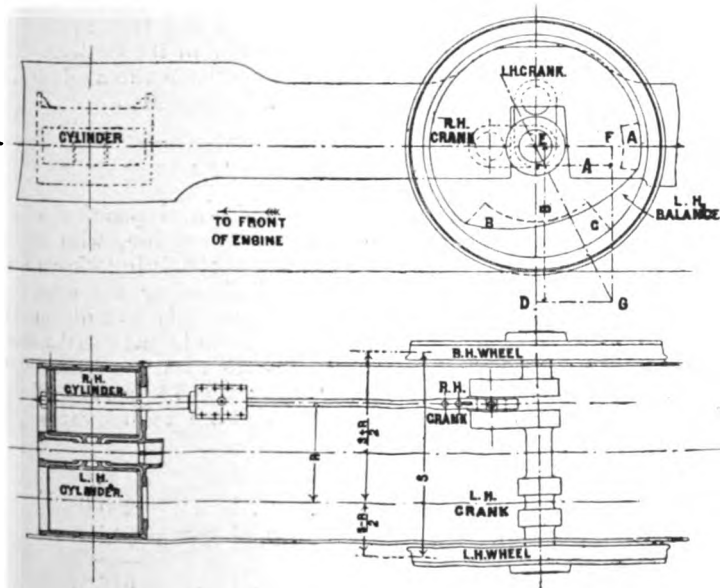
Balancing of Inside-cylinder Single Engine.
